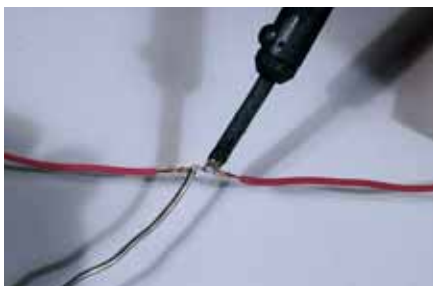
SOLDERING. Heat both wires with the iron, then touch the solder to the wires (not the iron). The solder should flow into the joint.
